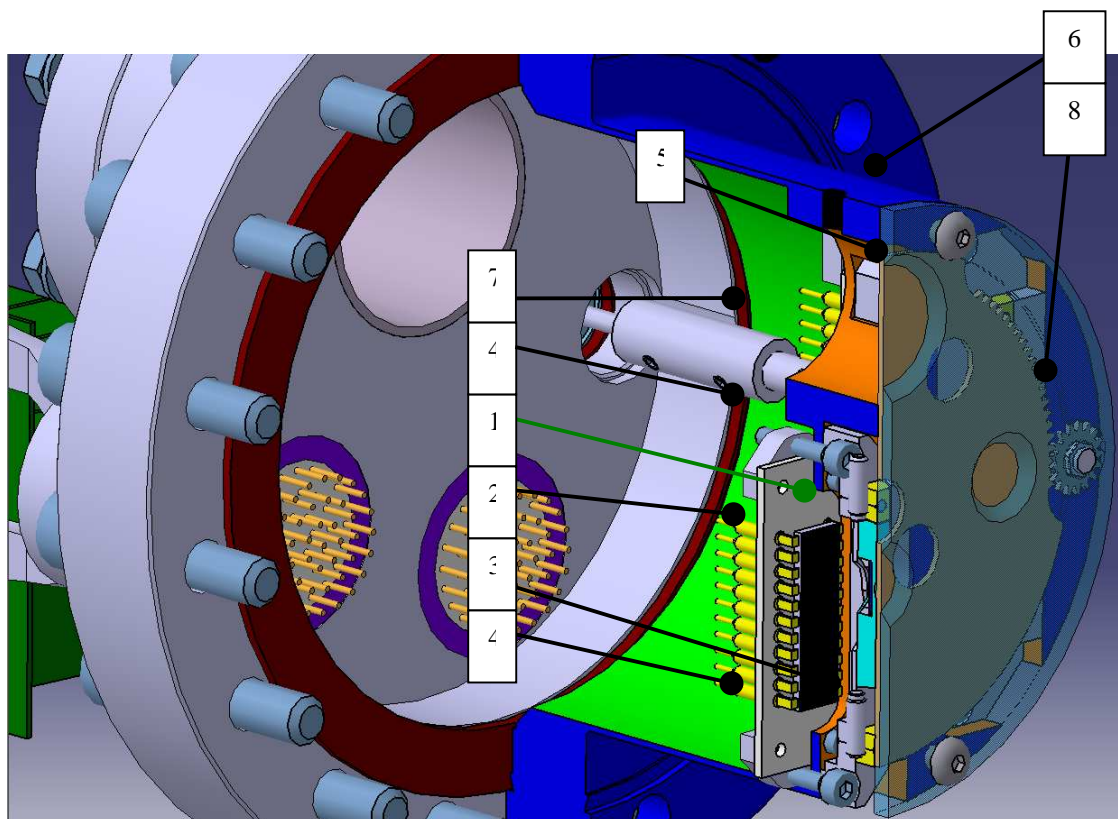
Port cut through (1-detector, 2-detector socket, 3-air slit holder, 4-nut, 5-shutter, 6-hood (holds the shutter), 7-connection shaft (links shutter jack and rotary feedthrough), 8-shutter jack)
